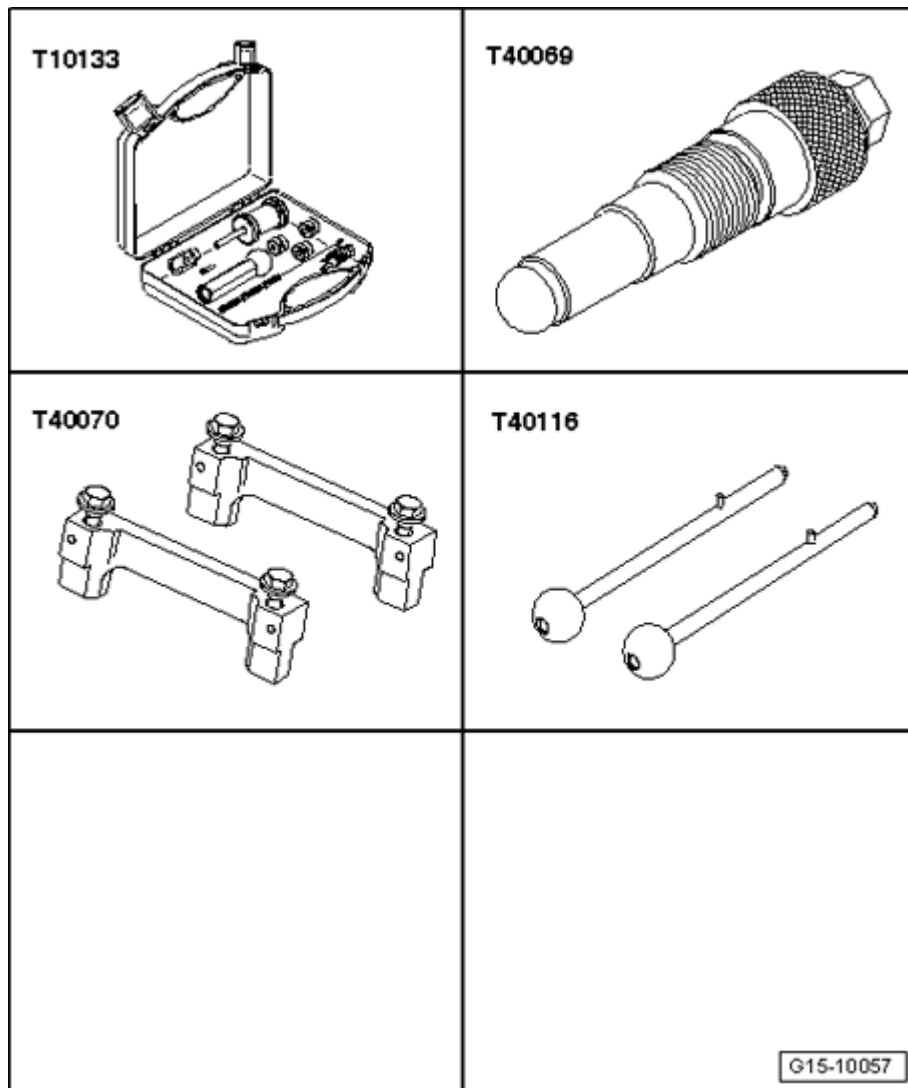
Identifying Special Tools - Camshafts, Removing And Installing
